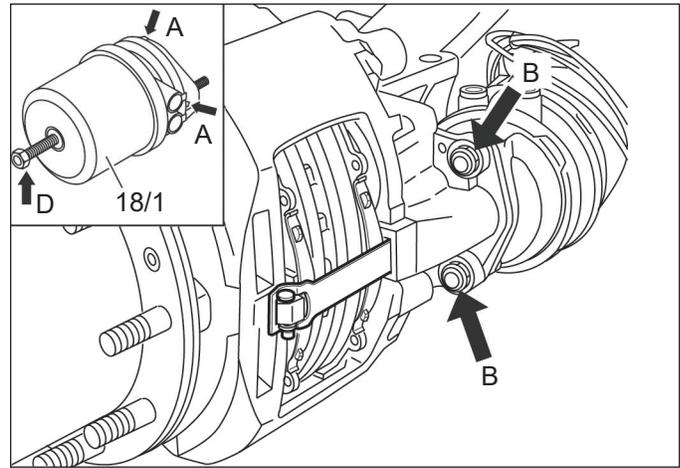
Piston-Style Spring Brake Actuator Caging and Removal
